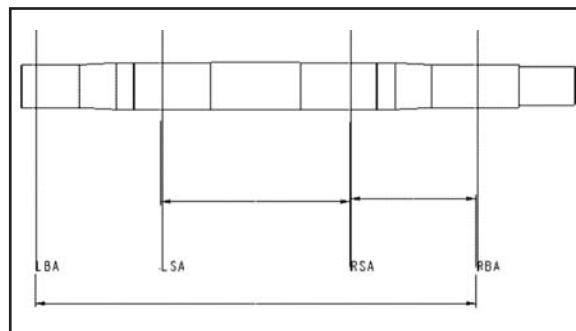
Relations for location of Sprocket and Bearing assemblies (A & B)
